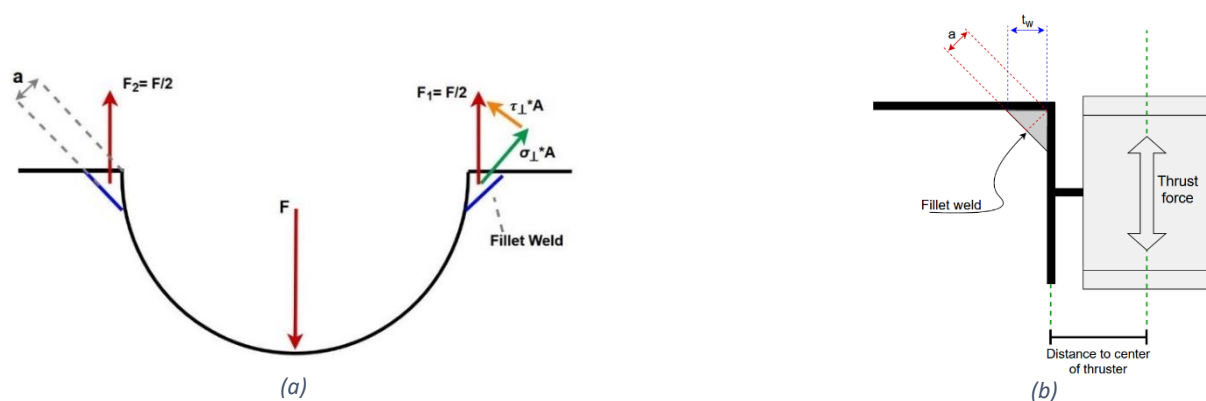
Overview of forces decomposed on the lower aluminium hoops, and thruster bending moment. (a) Forces on the lower hoops and welds, while (b) Thruster bending moment on welds
